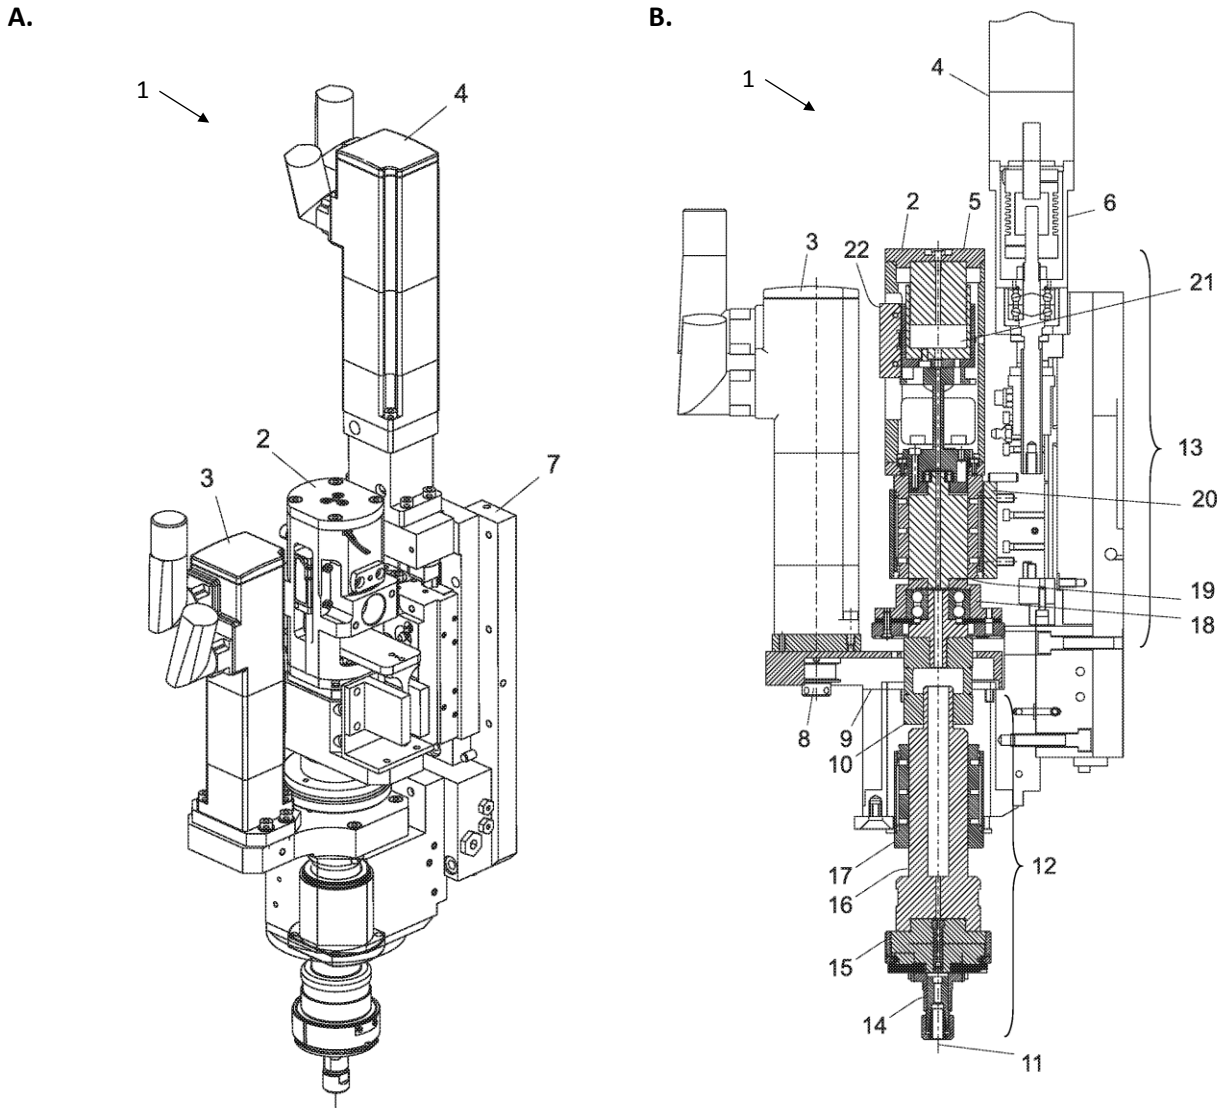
Developed force-sensitive machining head with actively controlled stiffness for the industrial SACE machine to achieve high quality glass machining of SACE process, detailed in patent WO 2017/064583 A1 (20 April 2017) [60]. A. Three-dimensional model of the machining head and its components. B. Cross section of the machining head and its components. Reference numbers used in this figure are detailed in the text below.
